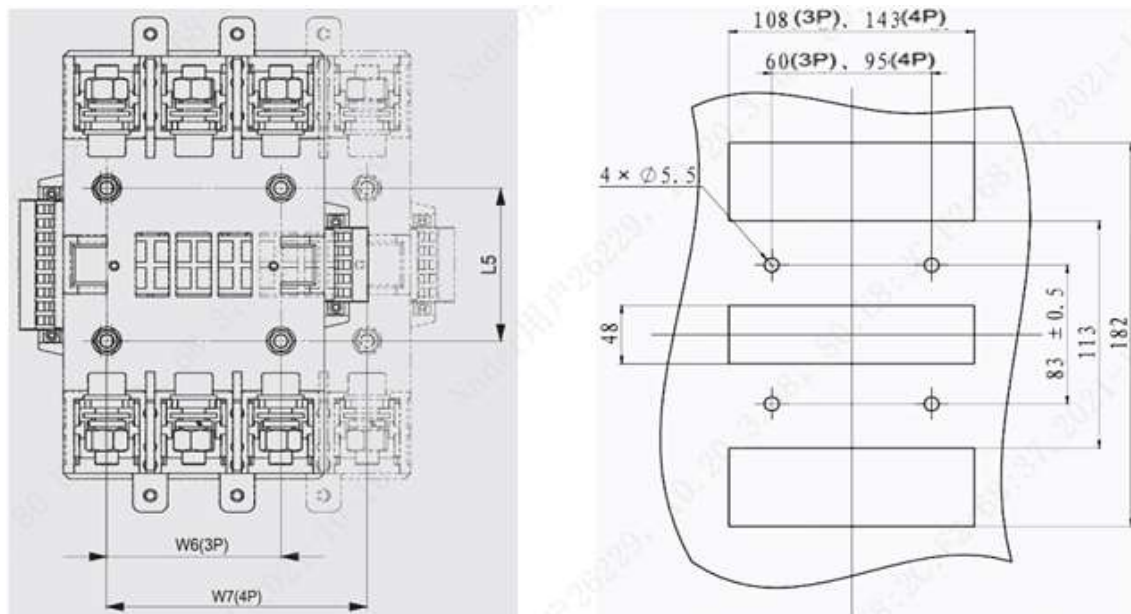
3P、4P Mounting hole dimensions of plug-in connections
